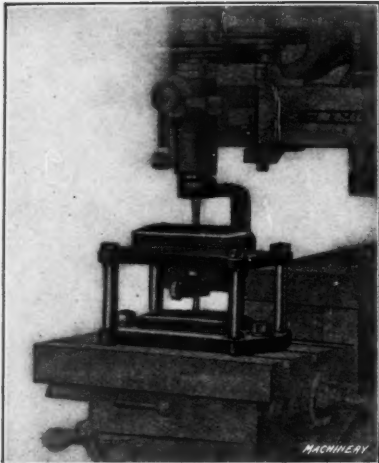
Attachment for Use in engraving on Convex or Concave Surfaces
